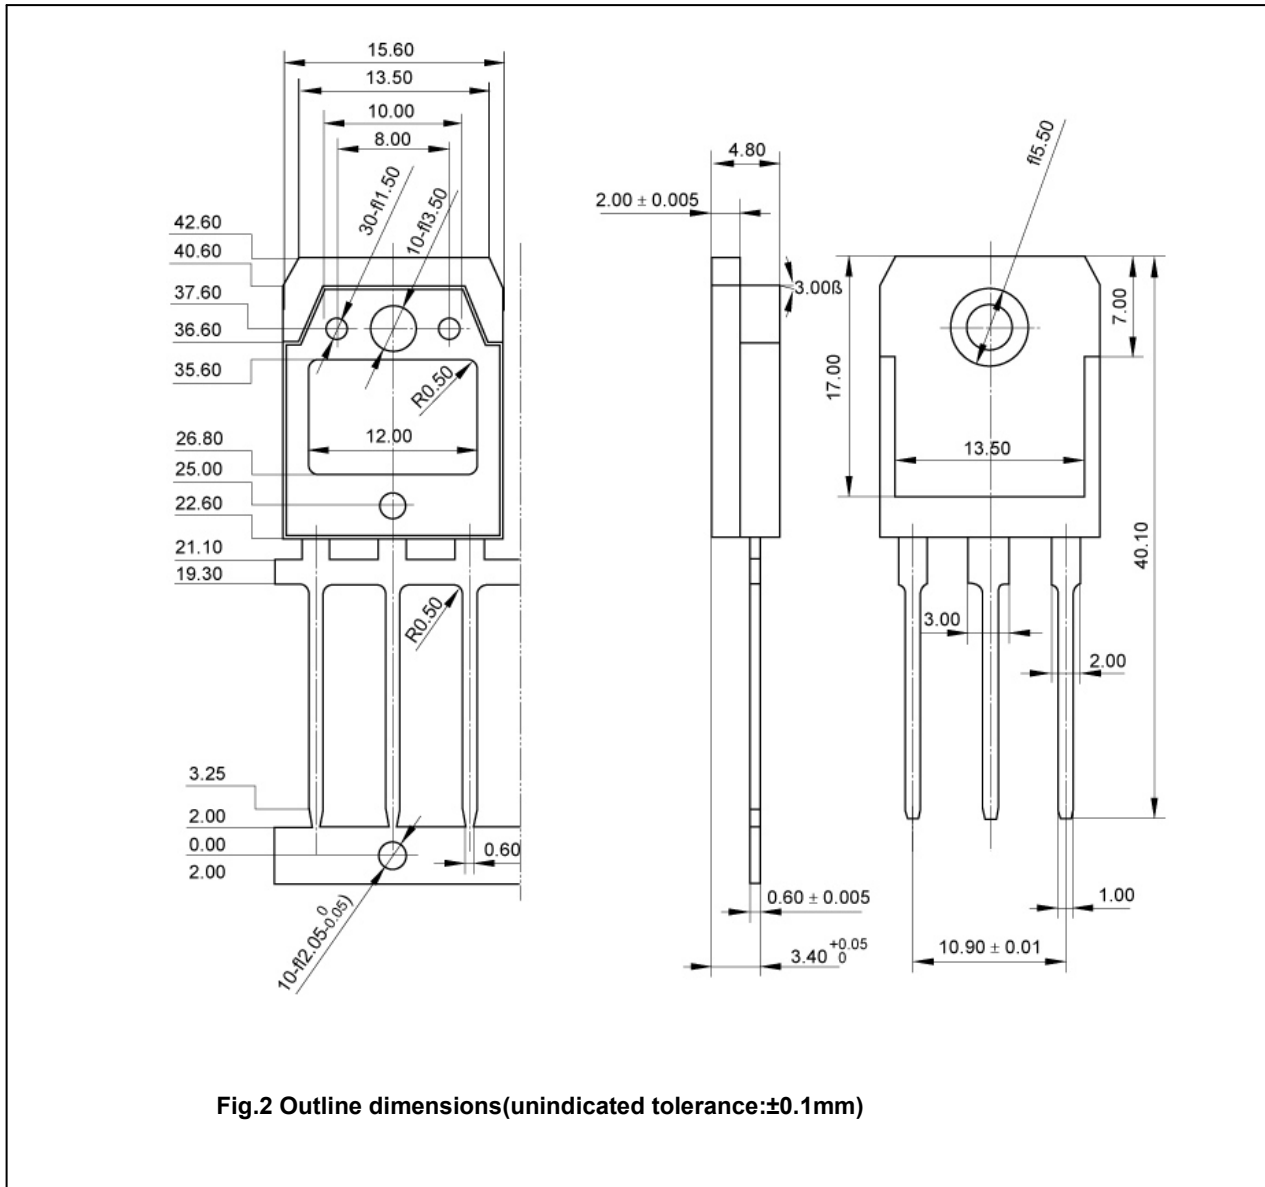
Outline dimensions(unindicated tolerance:±0.1mm)
